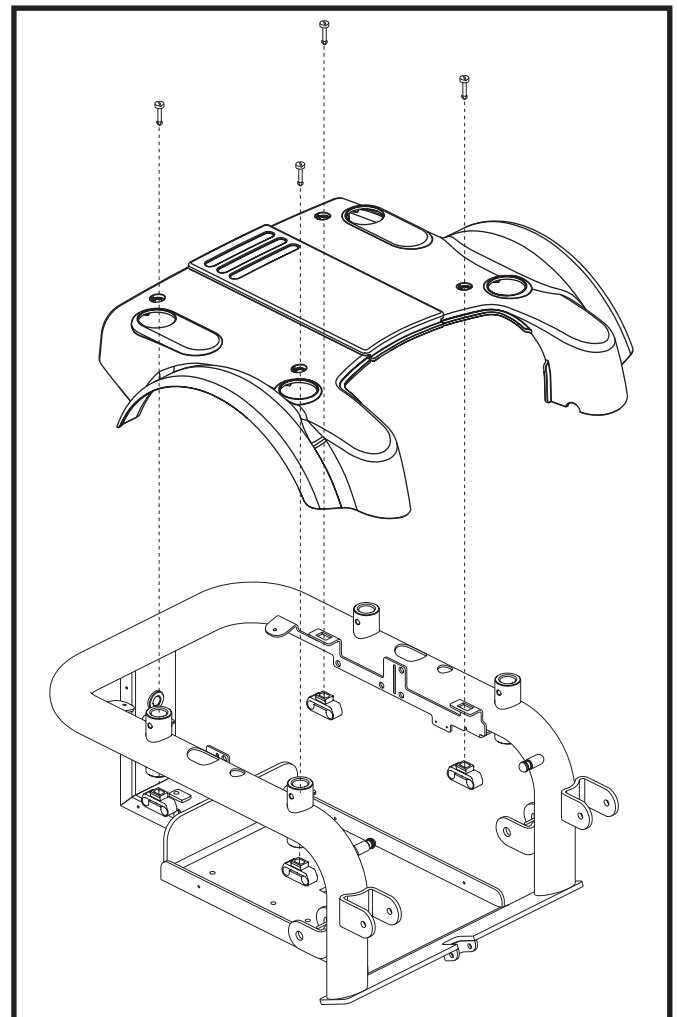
Jazzy 1121 Shroud Assembly/Disassembly
